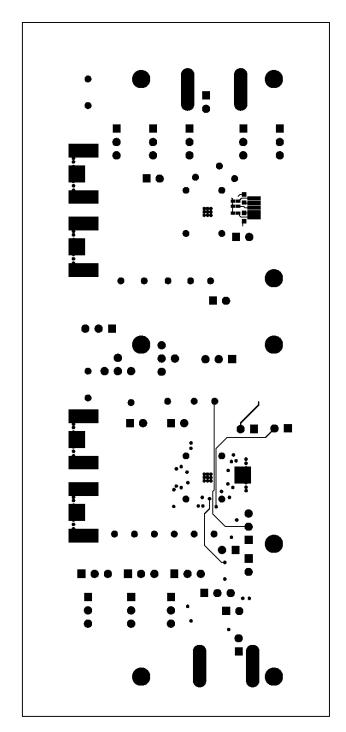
MAX3737 EV Kit PC Board Layout— Solder Side
